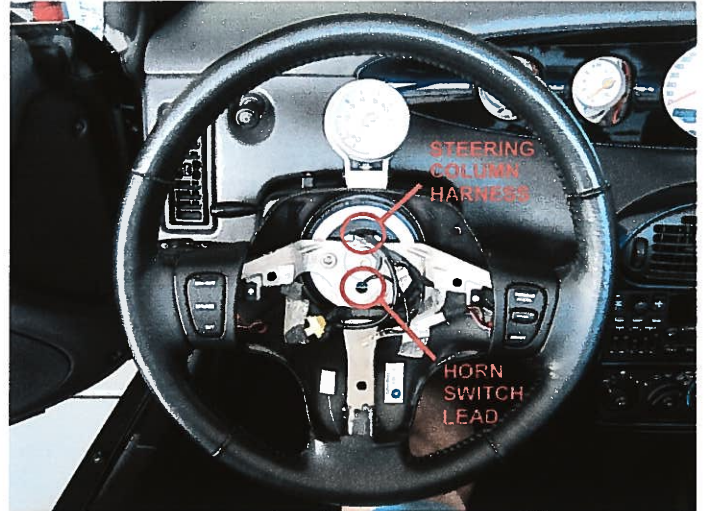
Use the steering wheel puller to draw the steering wheel off the steering column shaft..
